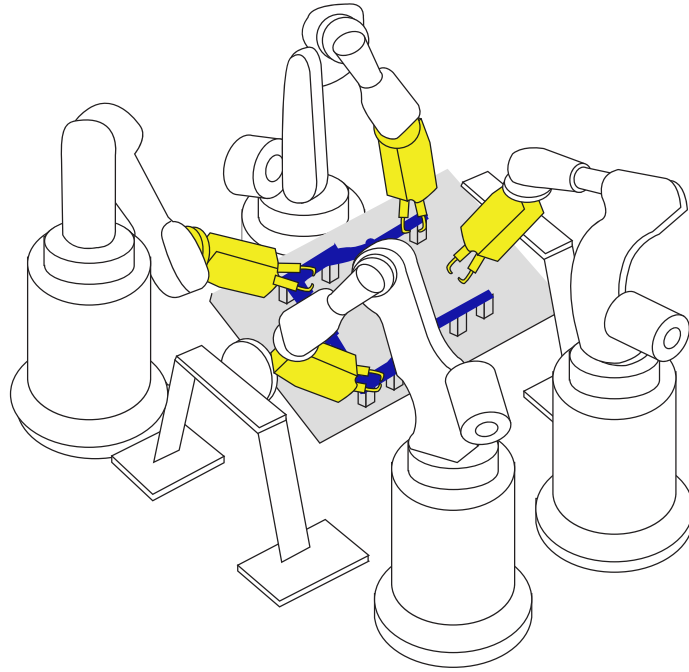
Platform robots performing welding tasks at the same time on the same blue work-piece. The yellow welding guns that each robot holds are highlighted in the picture.
